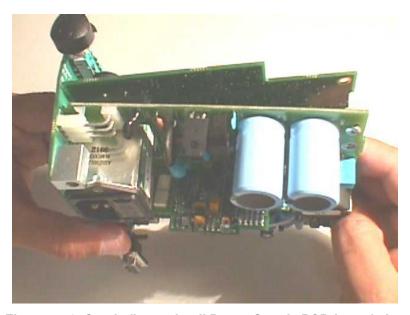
Gently flex and pull Power Supply PCB free of pins
